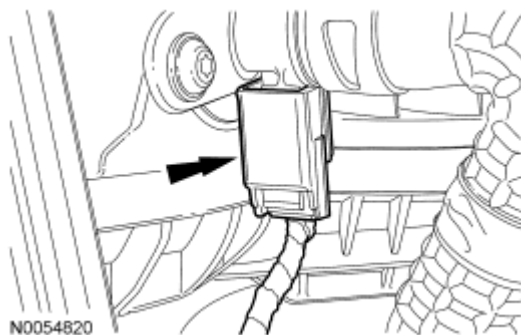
Identifying Positive Crankcase Ventilation (PCV) Fitting Electrical Connector
